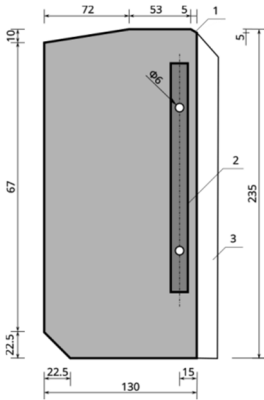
Working element for Belle, Halcon, Enaro trowels, diameter 600 mm, size 235x130 mm, manufactured by Dysk Bud, 1 – surface of the working element, 2 – mounting, 3 – stiffening
